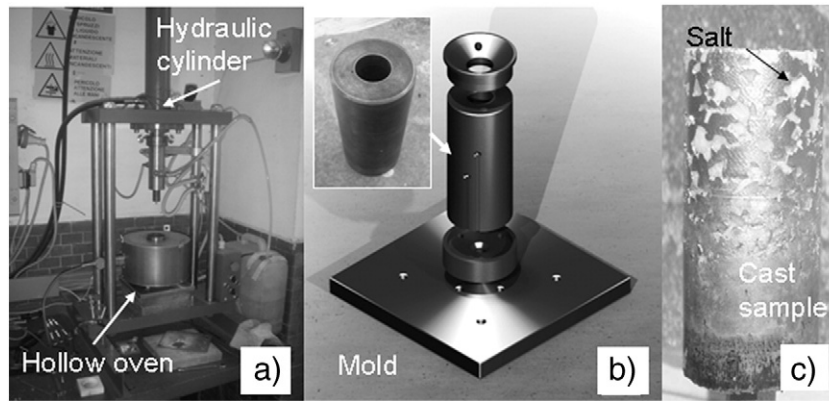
Experimental apparatus for foam casting: a) the hydraulic press; b) the mold; c) a cast sample before the salt removal.
